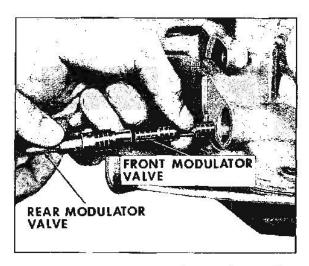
B-40 Removing Vacuum Modulator Valve Assembly
